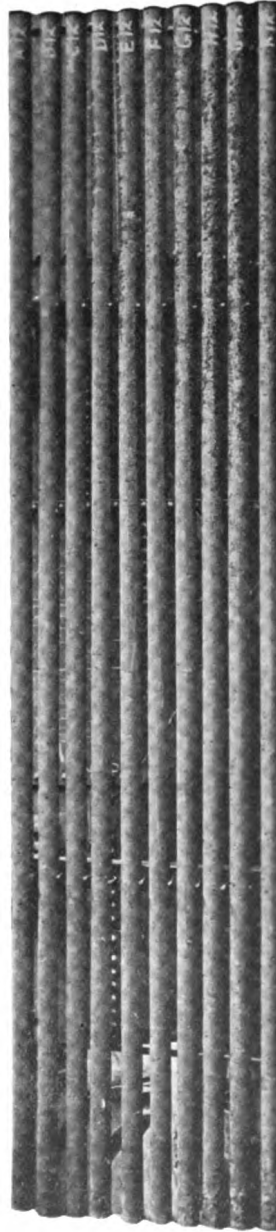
APPEARANCE OF TUBES, BOILER No. 4048, AFTER DISMANTLING. VERTICAL ROW, TWELFTH FROM RIGHT SIDE OF BOILER
